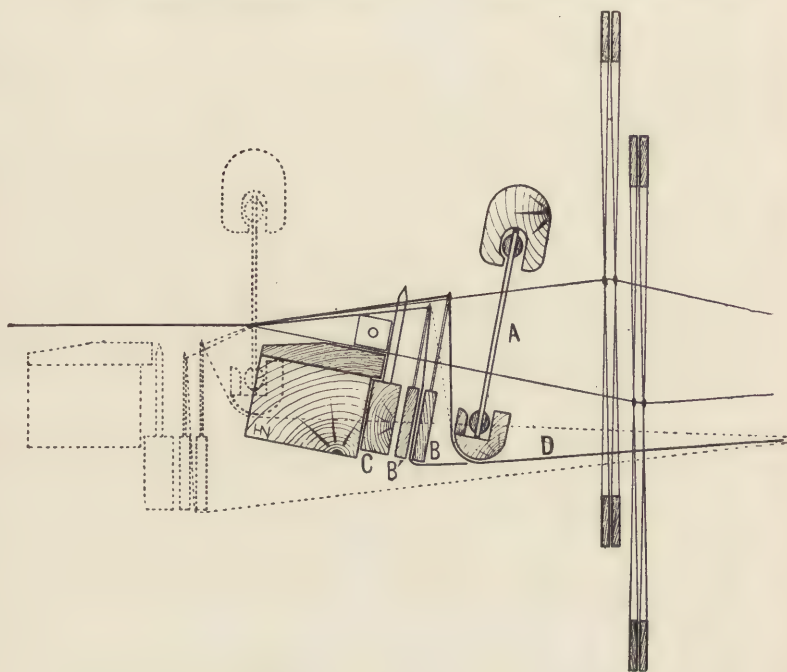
Part Sectional End Elevation of a Loom adapted for Lappet Figuring.
